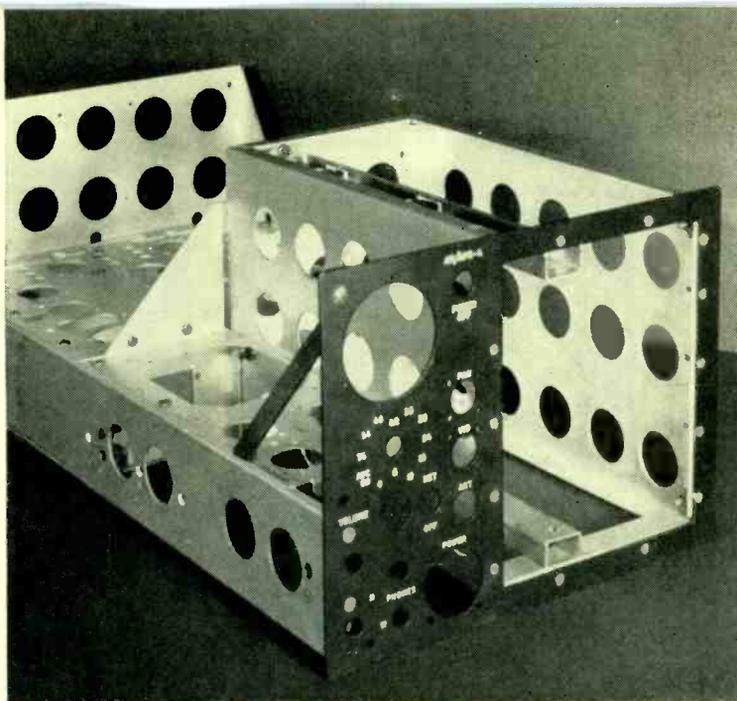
Military equipment chassis, illustrating use of removable top and side skirts and plug-in subchassis
